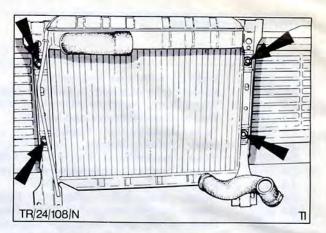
Arrows show radiator mounting bolts. Viewed from engine compartment for clarity
